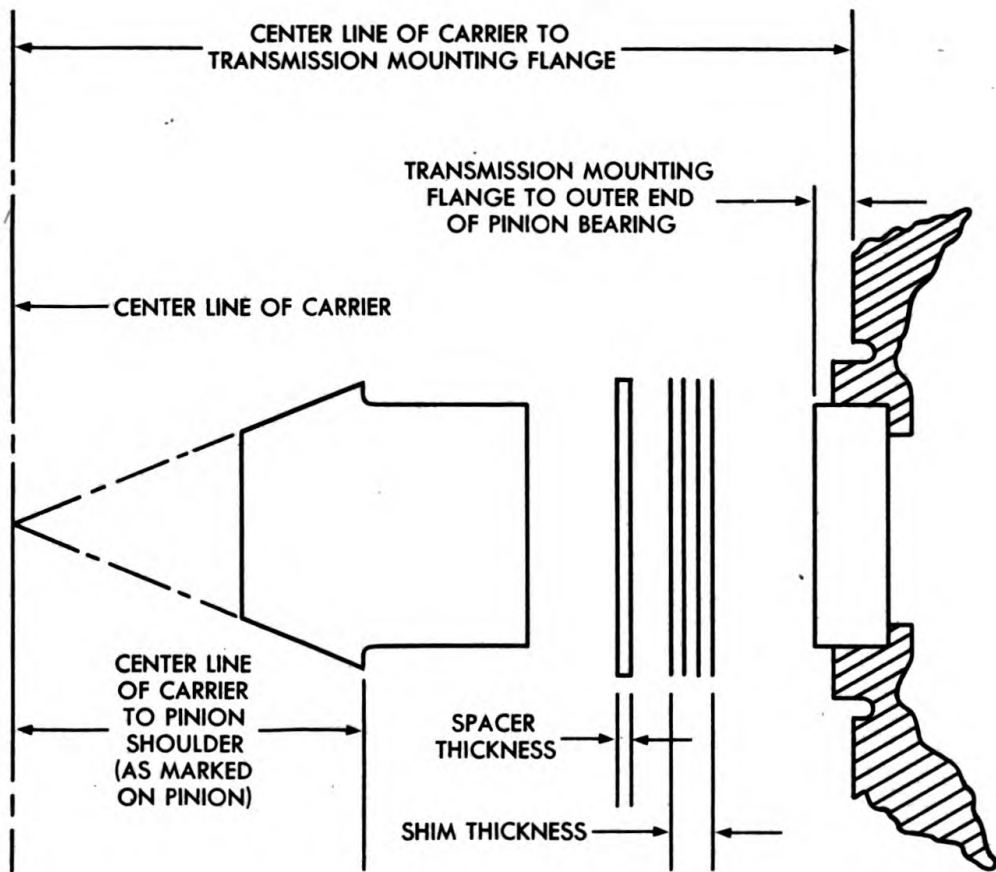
Instruction Drawing for Determining Shim Thickness Between Transmission Pinion and Bearing
